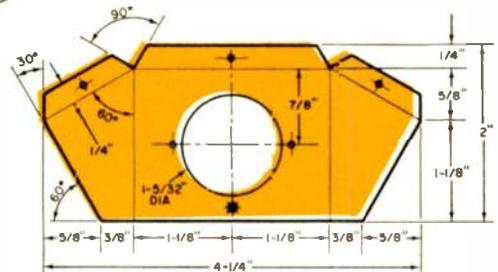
Details of the mounting holes and other mechanical work are shown in this dimensioned sketch.
